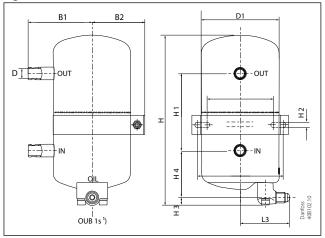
OUB 1/OUB 4 (flare & solder connection)
